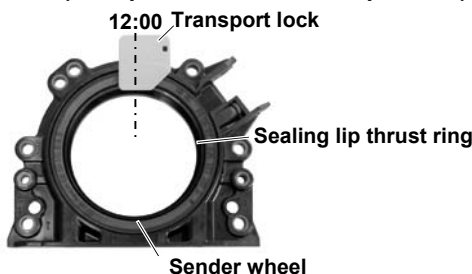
Sealing flanges with integrated sender wheel (transport lock at 12'clock position)
